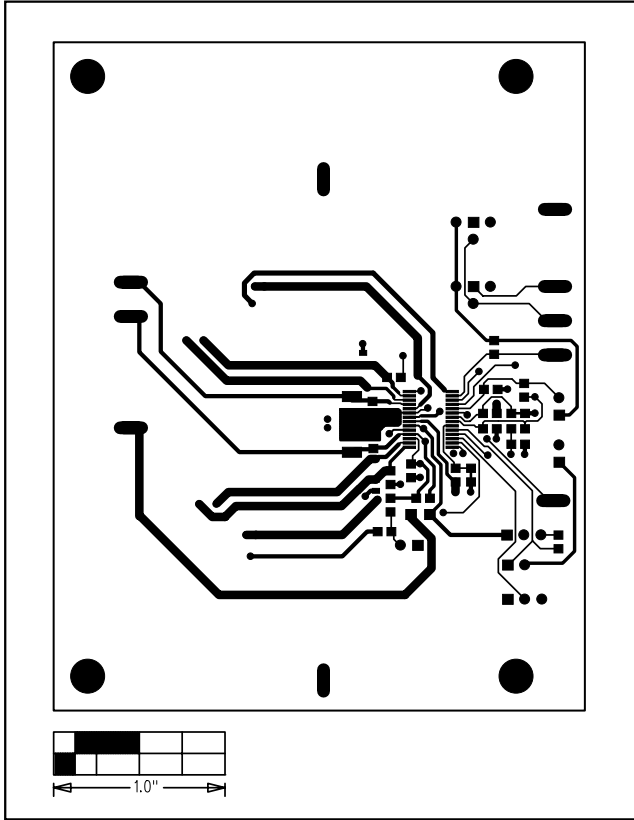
MAX1999 EV Kit PC Board Layout—Solder Side
